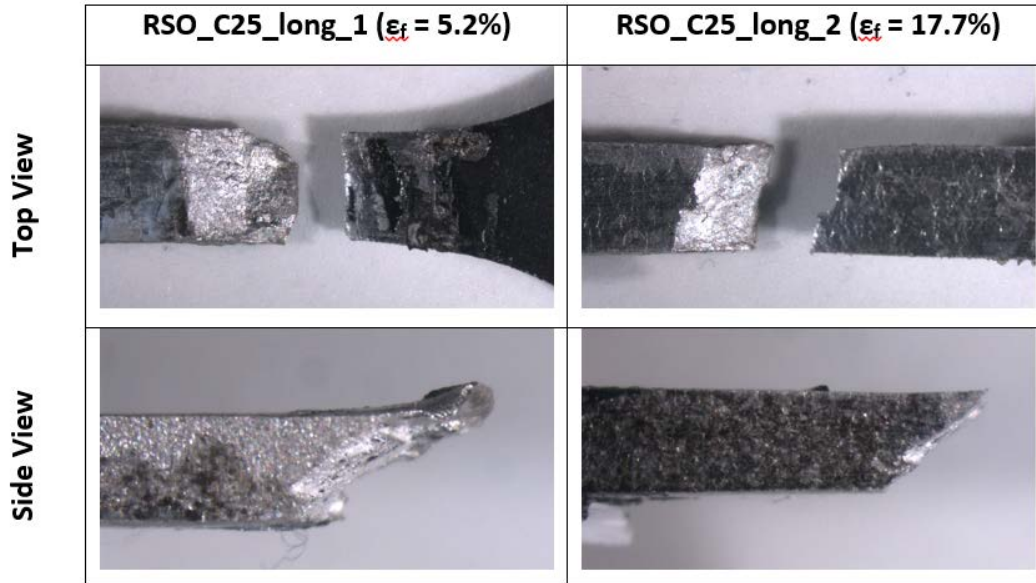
Fracture patterns of 2 parallel specimens of the C25 sheet. Note the gage width of the specimens is 3 mm.
